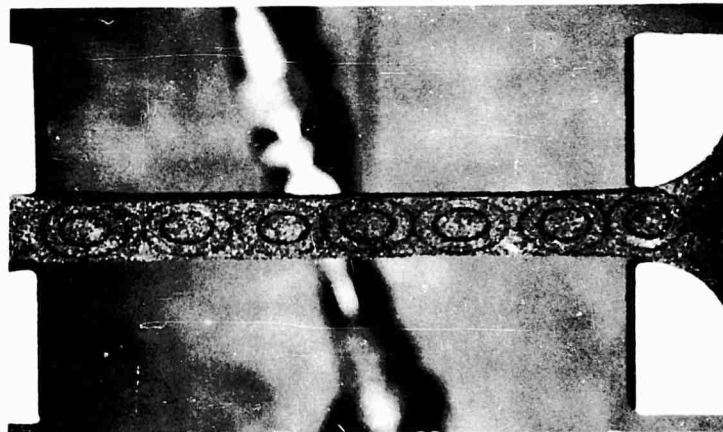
Machining Other Face of Propellant Block Using Vacuum to Hold First
